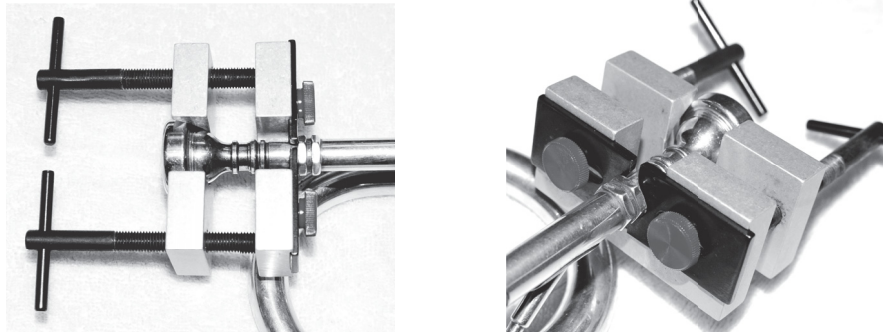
Using a mouthpiece puller (*Original photo*)
